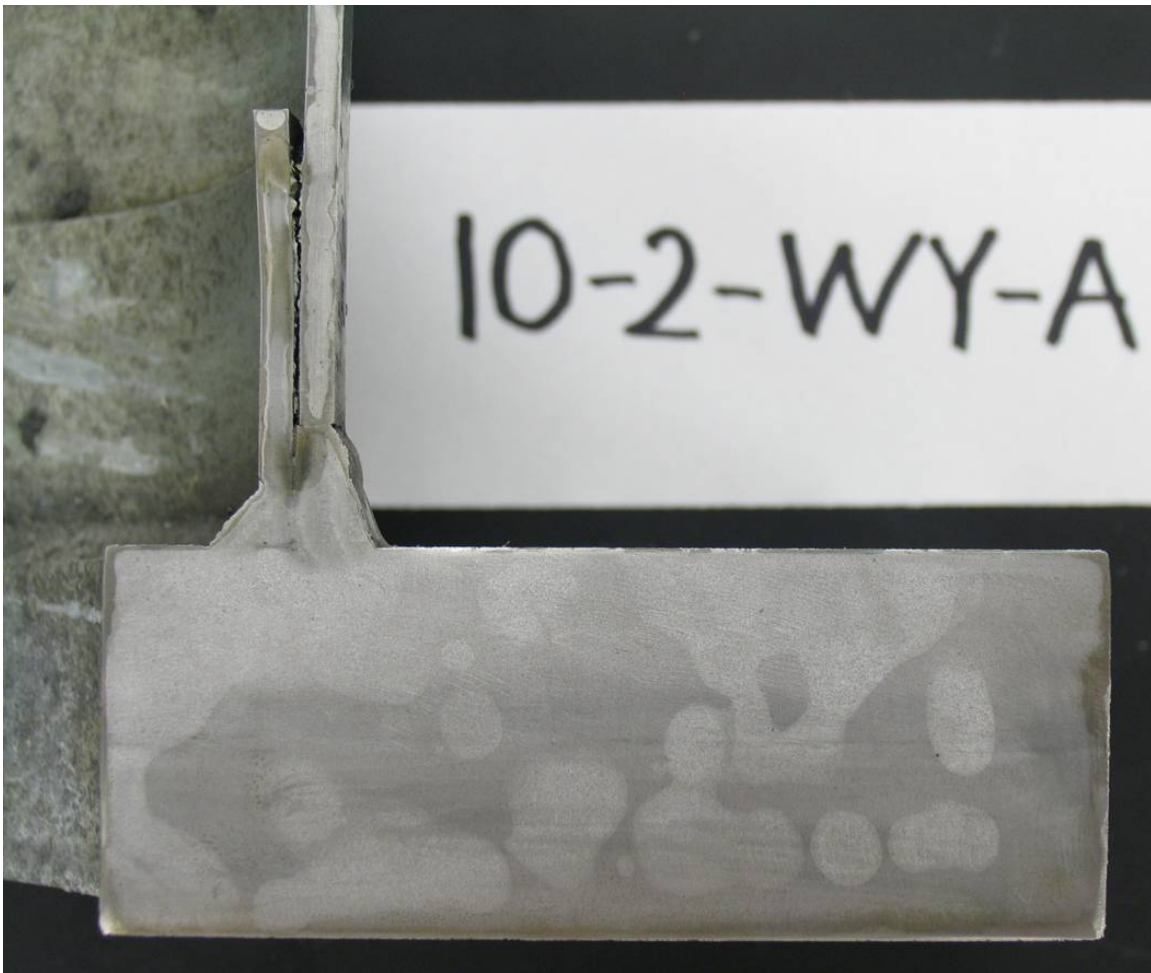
Etched Cross Section of a Full-Penetration Welded Specimen
